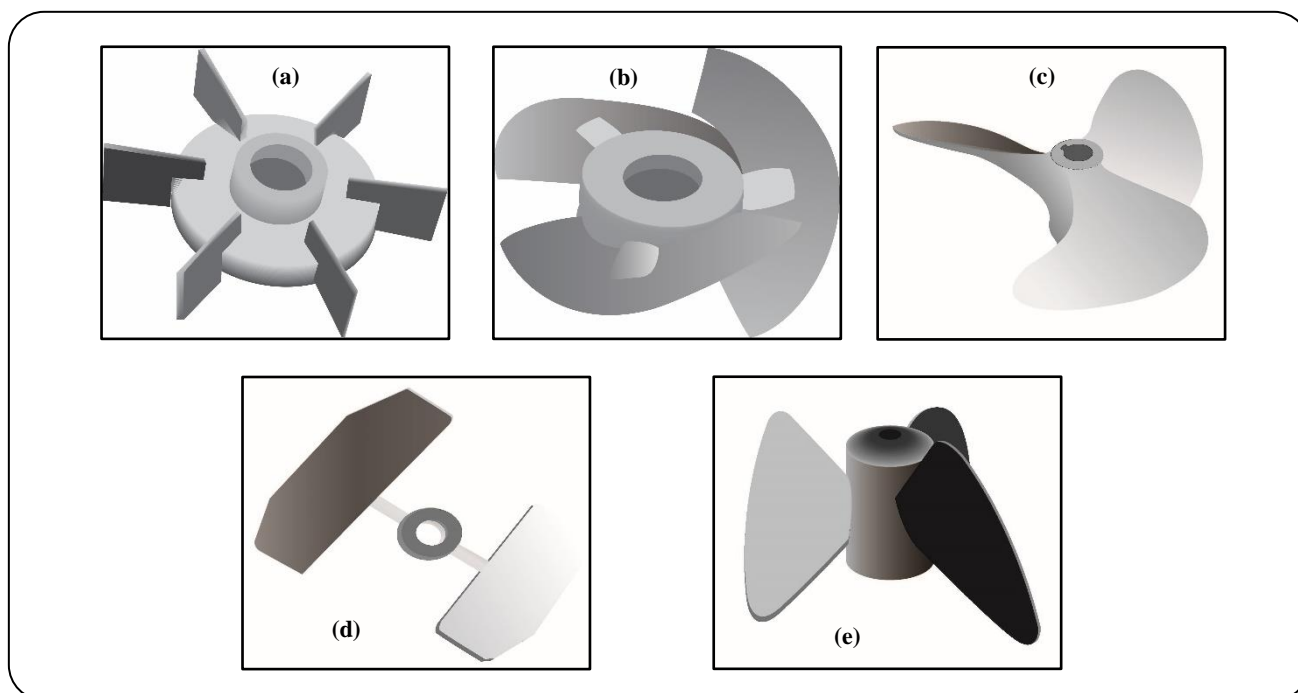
Schematic view of the five different types of impellers: a: Rushton turbine impeller, b: Segmented impeller, c: Marine impeller, d: Paddle impeller, e: Elephant ear impeller.
